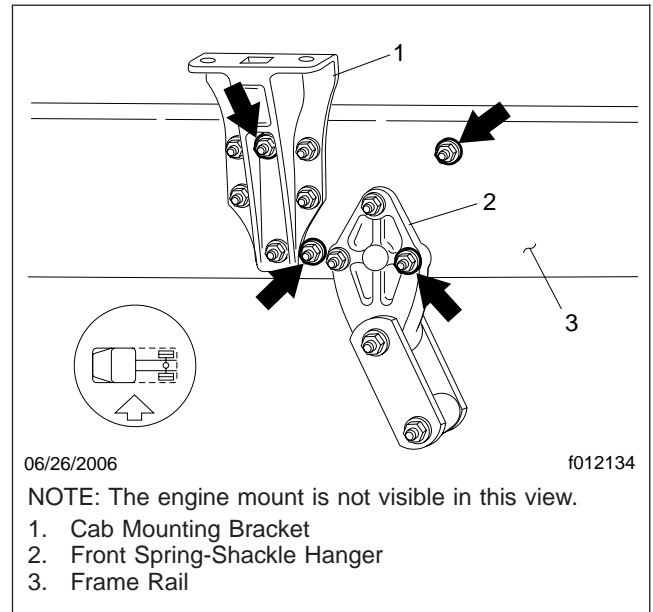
, Engine Mount-to-Frame Rail Fasteners
